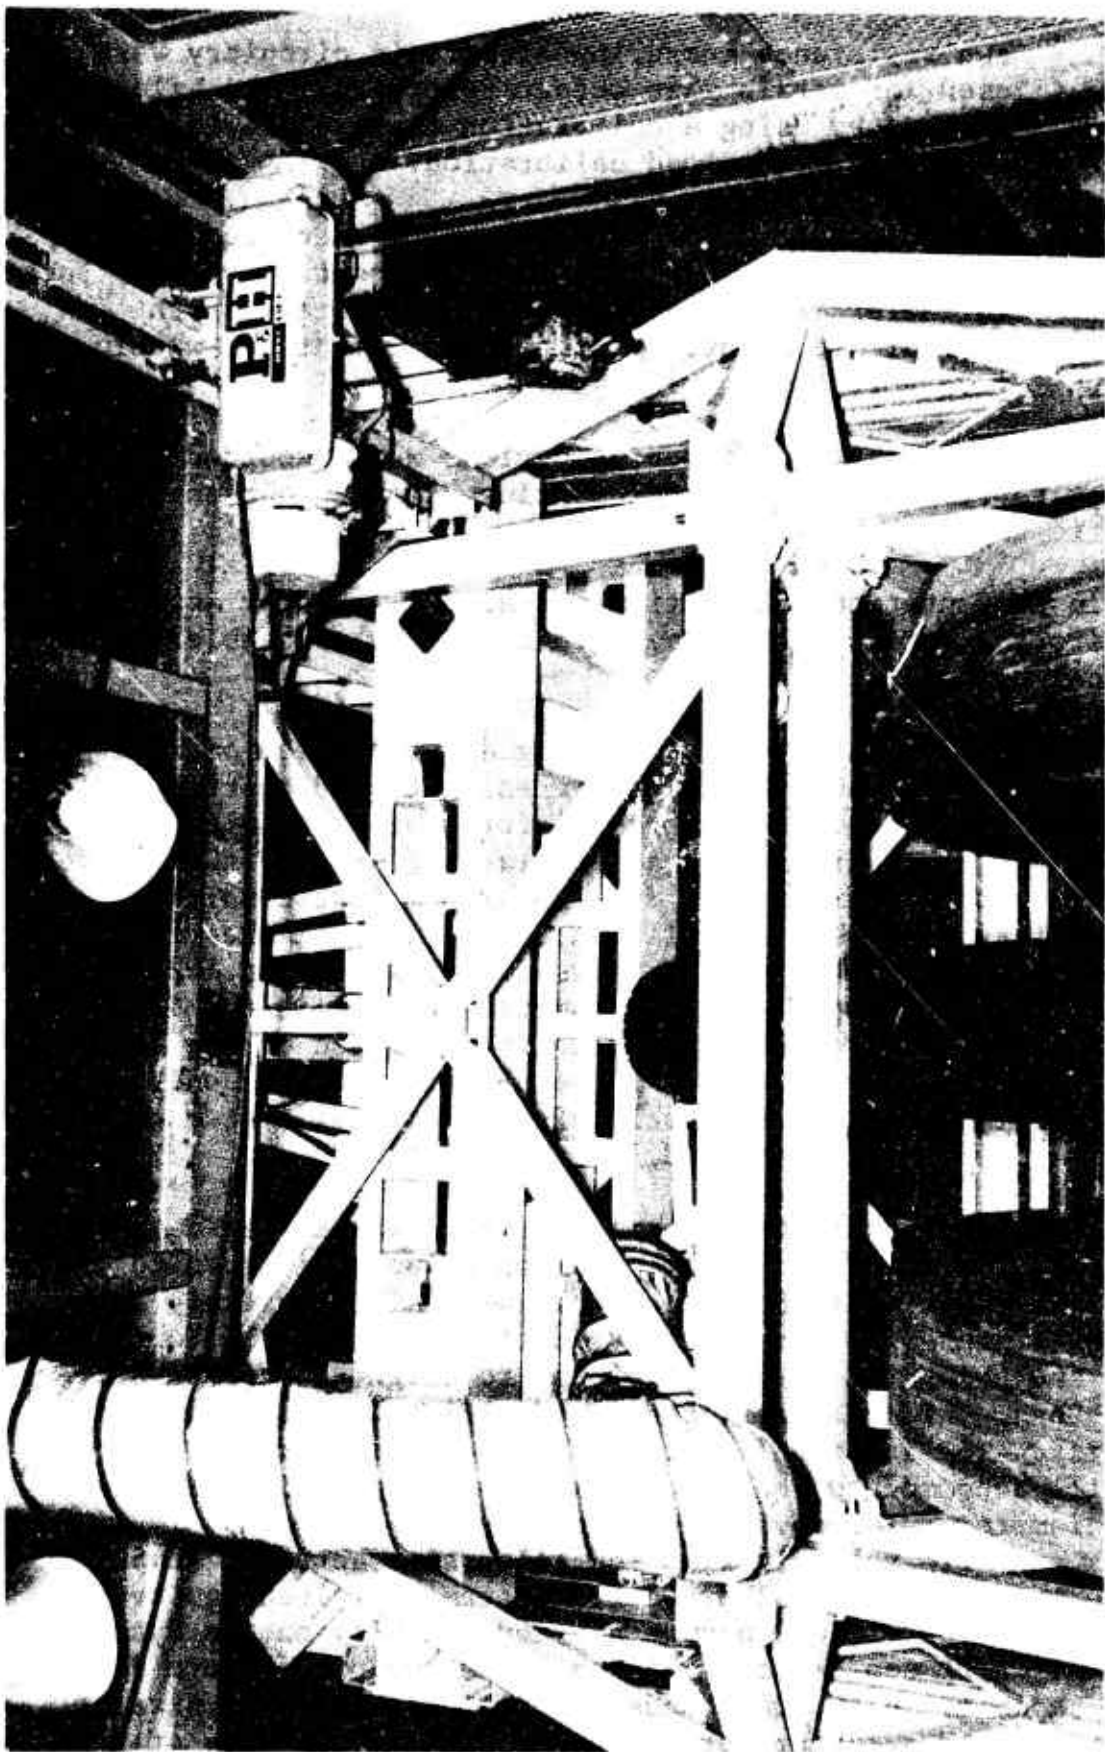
Total System Test Installation - Landing Gear and Support Fixture
